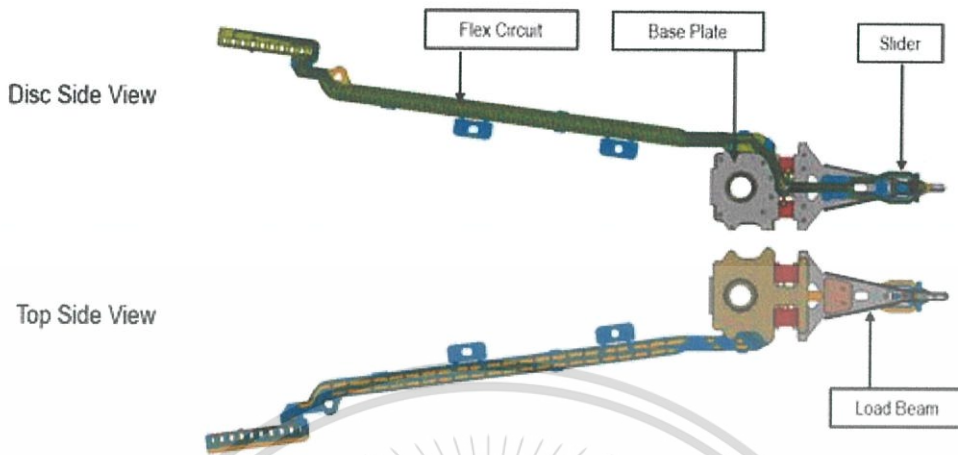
The image of Head Gimbal Assembly and Dimple position
